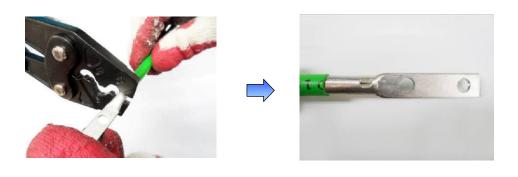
Fixing Pressure Terminal_Handheld Compressor (1)
